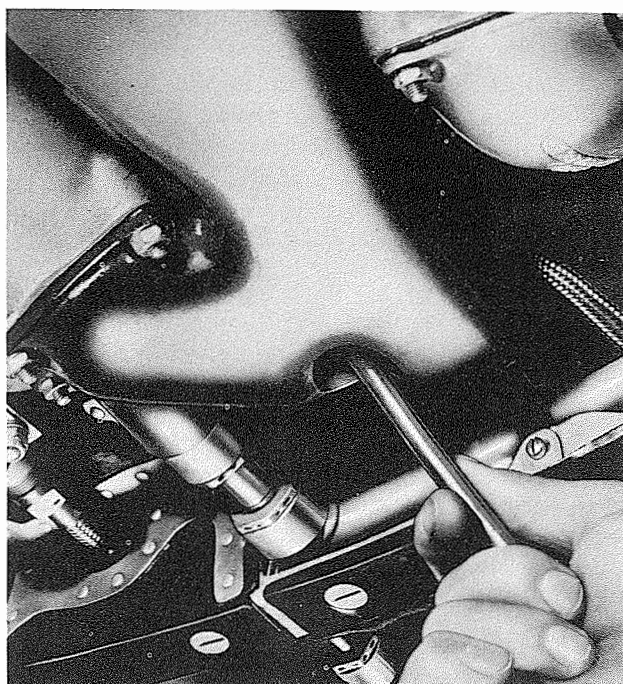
Removing Hidden Nut from Rocker Box Cover and Sump Assembly
